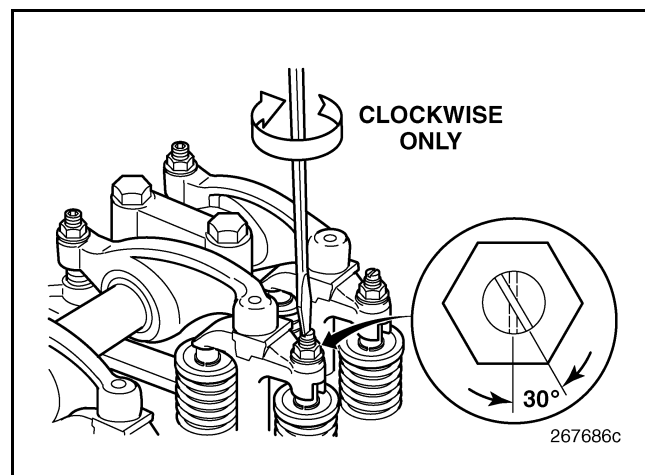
Turning Adjusting Screw an Additional 30 Degrees
